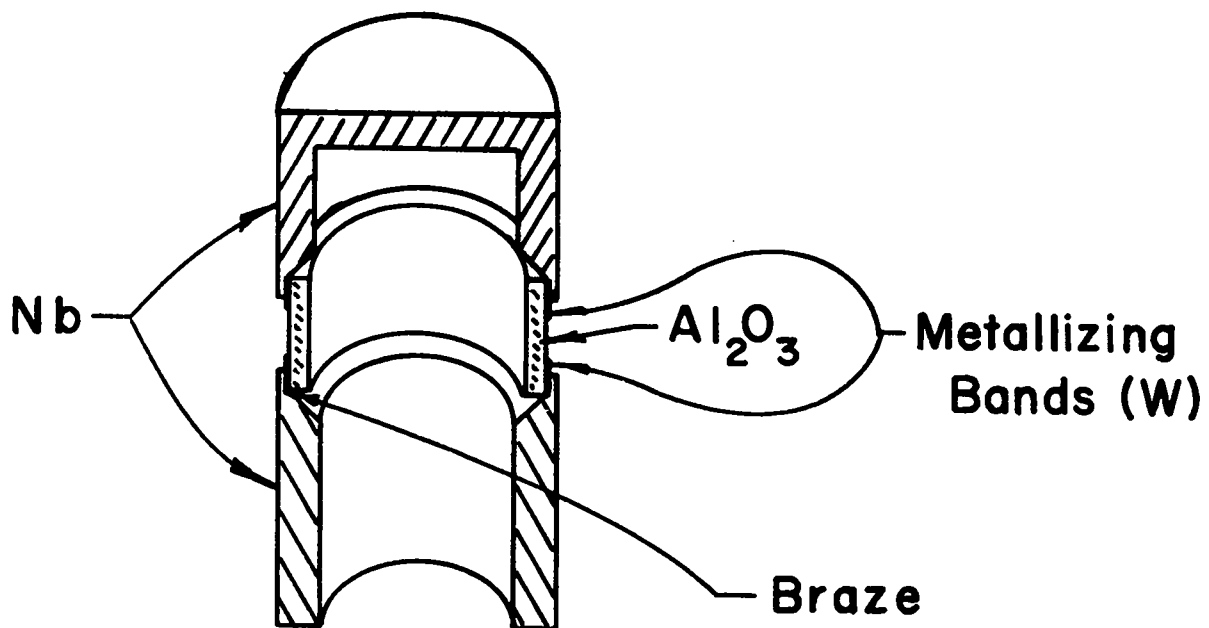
Configuration of ceramic-to-metal seal test pieces.
